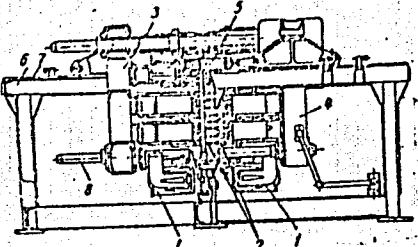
1 - welding transformers; 2 - welding guns; 3 and 4 - vertical plates; 5 - driving mechanism for plates; 6 - frame; 7 - guides; 8 - rods
